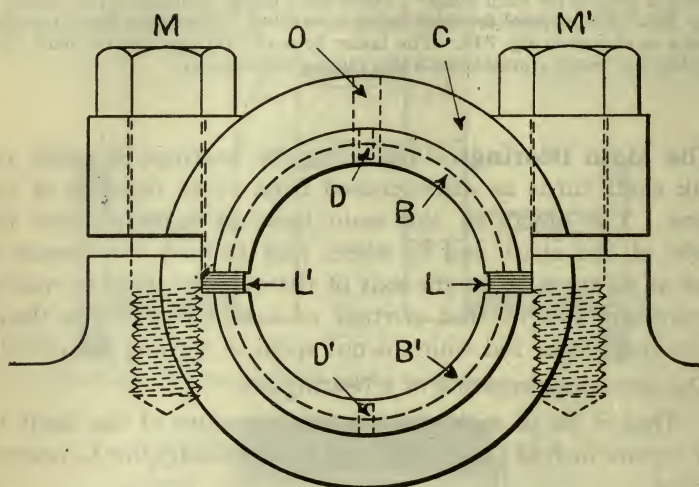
Main bearing for a vertical engine; adjustable by means of the bolts and liners on the sides.
